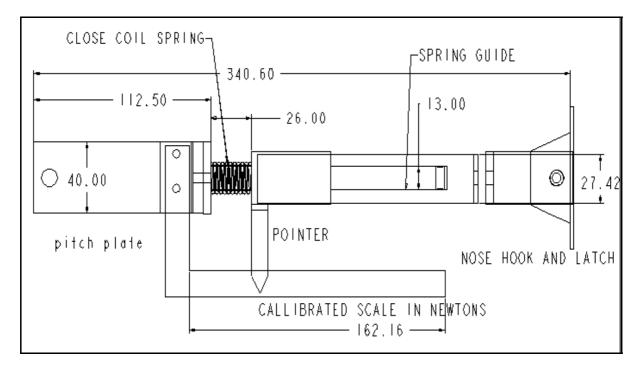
Detailed drawing of the Drag Measuring and Alerting Device
